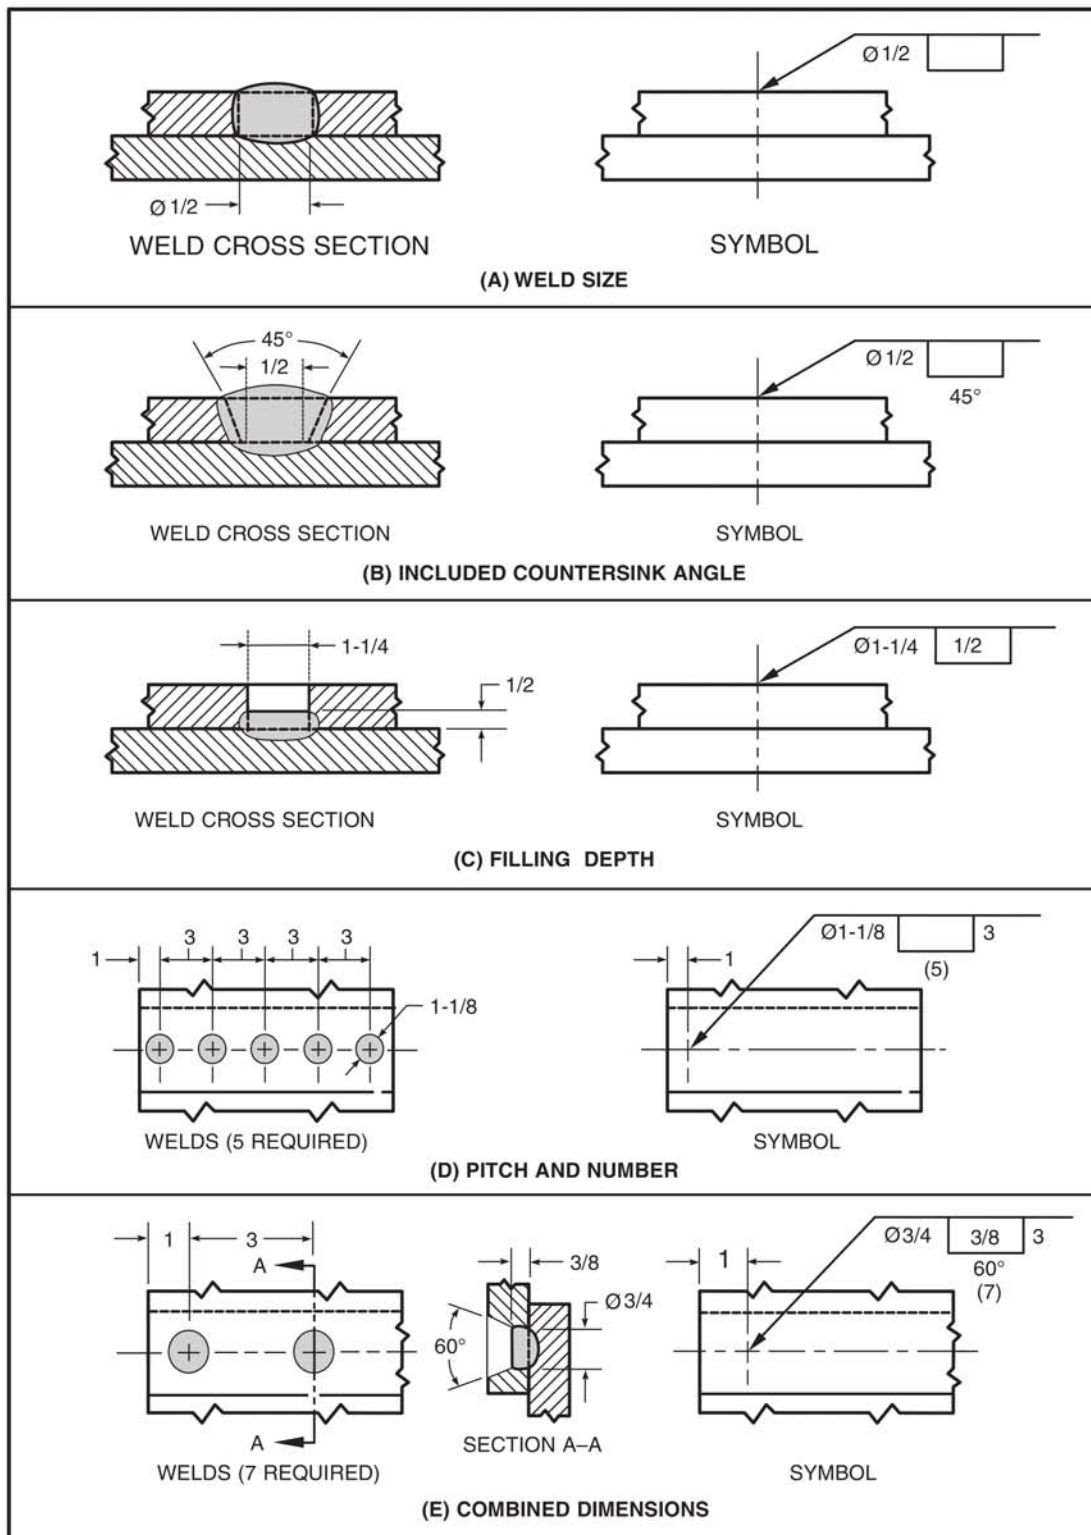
Application of Information to the Plug Weld Symbols
